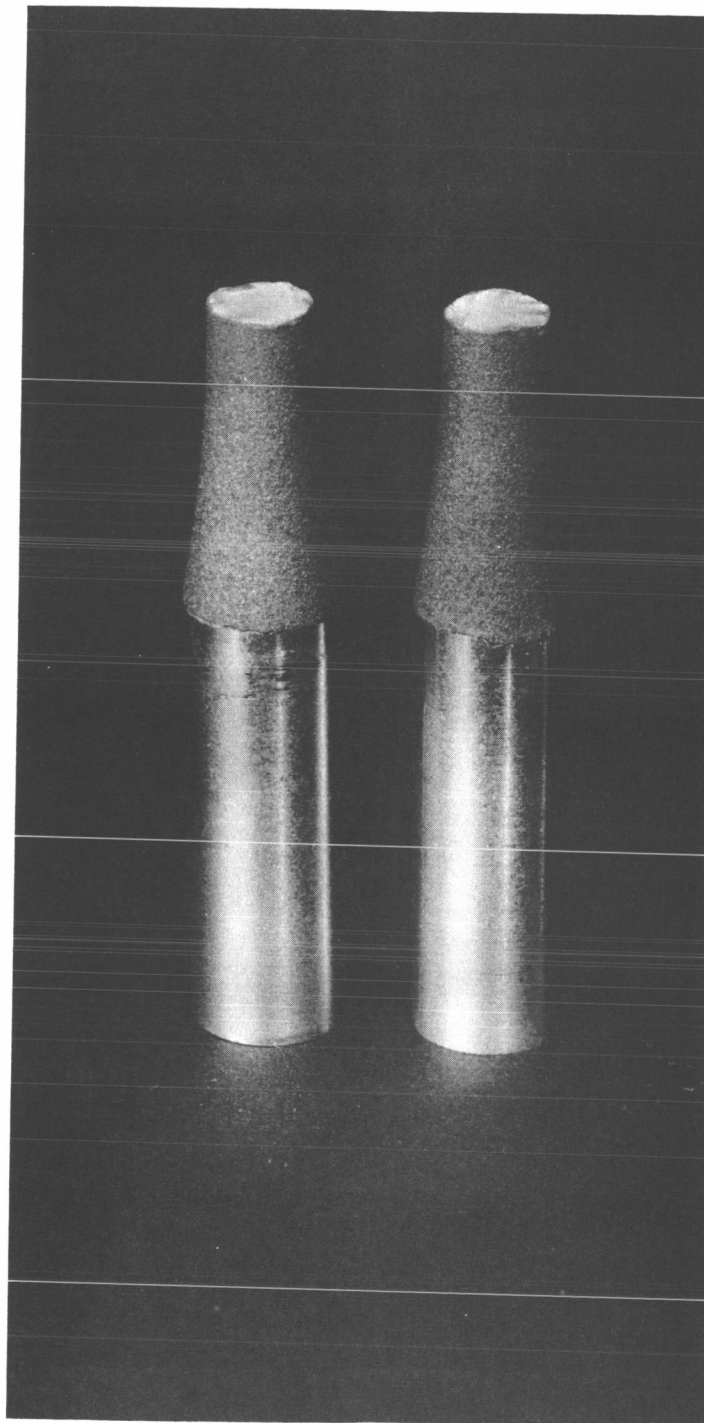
Fractured AISI-310 Stainless Steel Fatigue Specimen Coated With Iron Titanate
